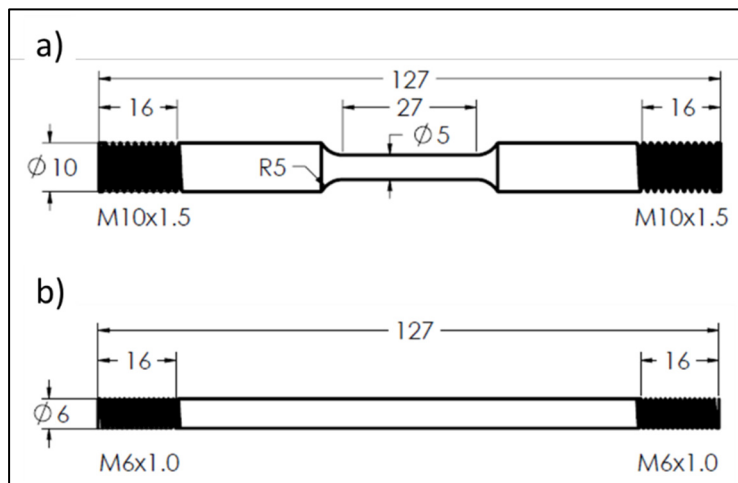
a) Geometry of the cylindrical specimen with reduced section; b) Geometry of the constant diameter specimen for test on austenite
